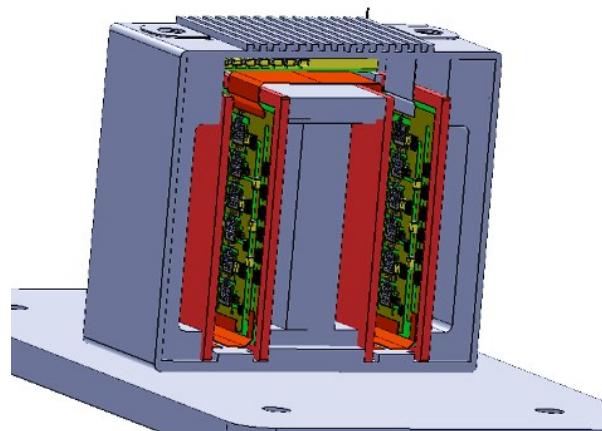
The added housing shows the boards and fluid flow channels across the heat sinks
